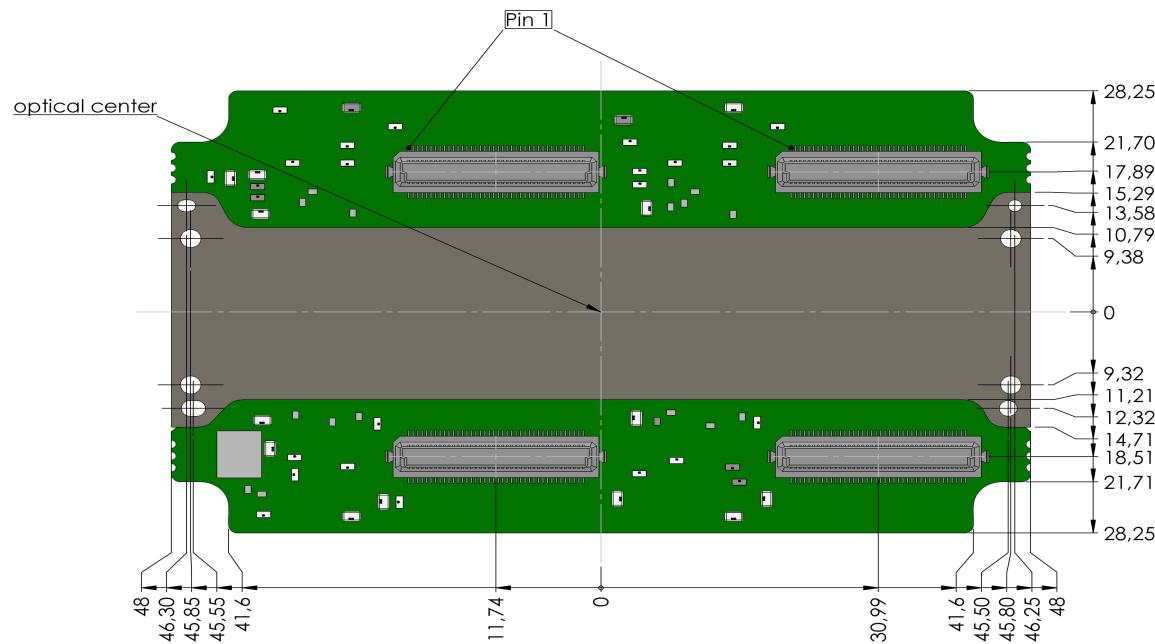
Bottom view DR-24k3,5 , DR-2XI2k7
